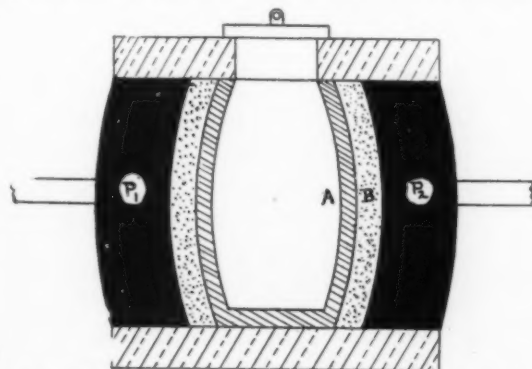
VERTICAL SECTION OF GIROD STEEL FURNACE.
